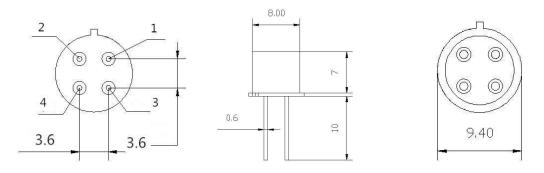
Mechanical dimension in mm and tolerance - ± 0.1 mm
